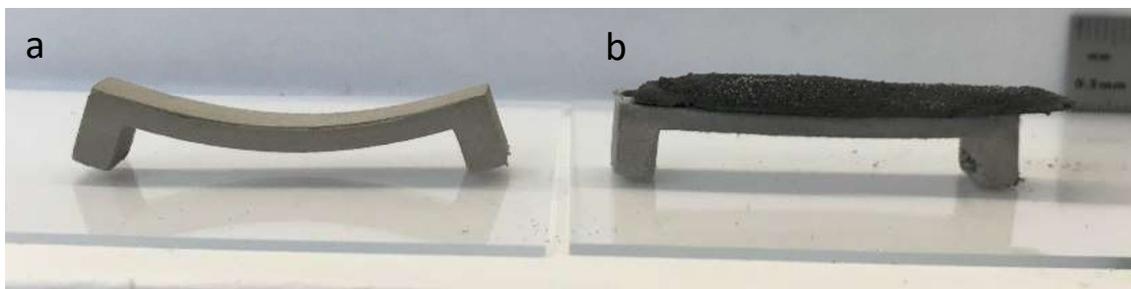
(a) Stainless steel part of 2.8 mm thick without SRSC-steel coating after sintering showed severe distortion compared to the part (b) with coating. (Note: 1 div = 1 mm on the ruler)
